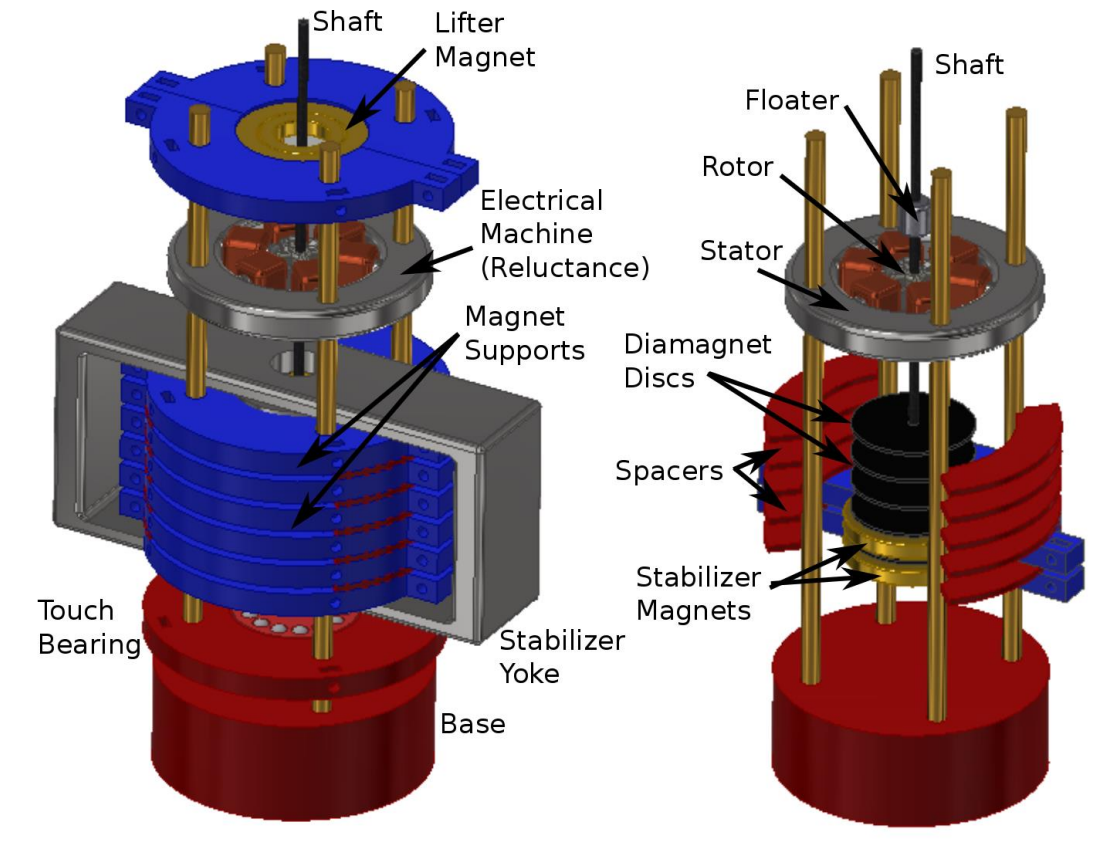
A simplified version of the Figure 2-13 design. On the left, a complete design for a proof of concept prototype. On the right, removing the outer supports to show the stabilizing machinery. Note that the floater used in the actual system was spherical.
